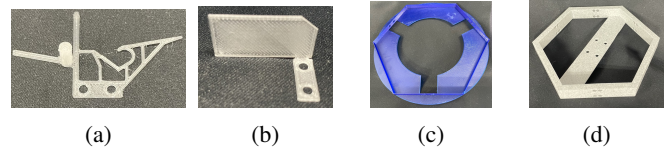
Components of the gripper. (a) Locking part, (b) twist panel, (c) resistance panel, and (d) base.
